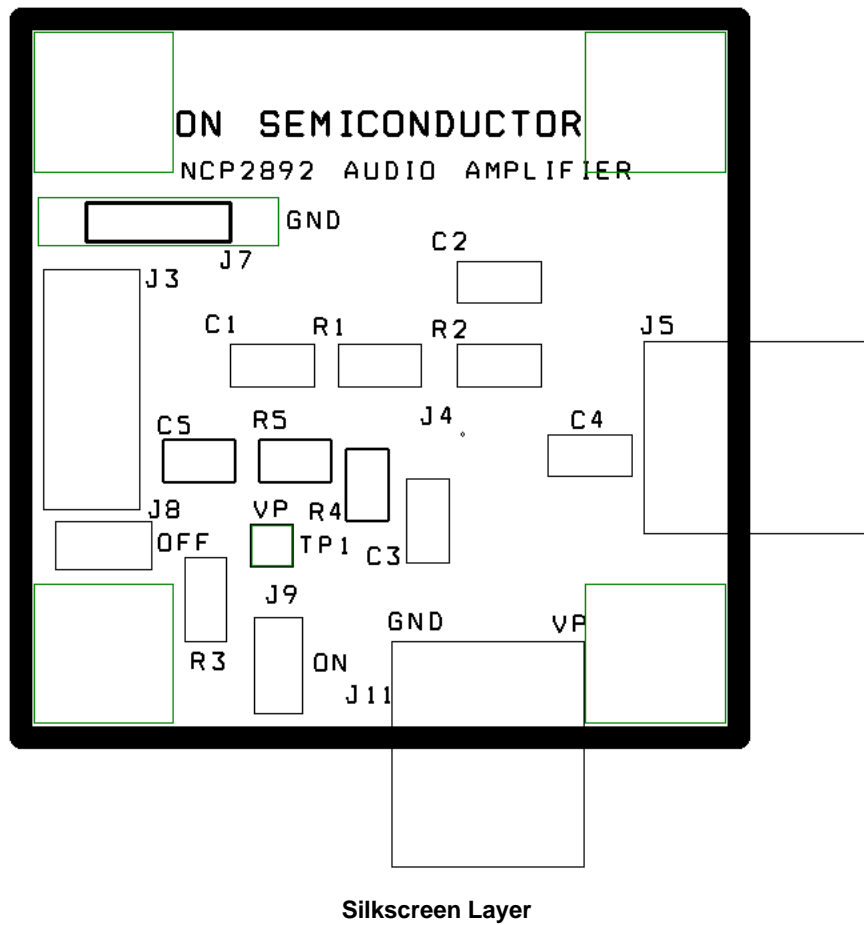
Demonstration Board for 9-Pin Flip-Chip CSP Device – PCB Layers
